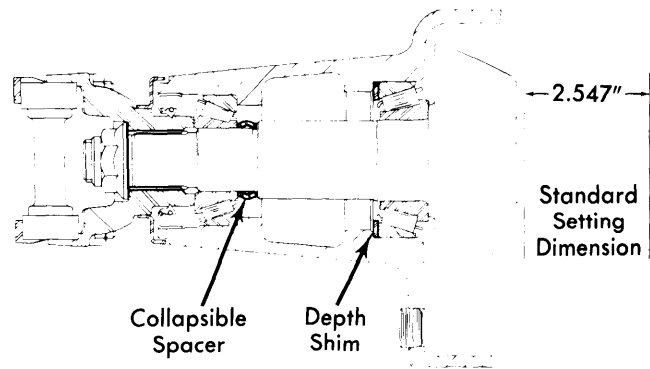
Sectional View Showing Pinion Depth, Shim Location & Collapsible Spacer Location
